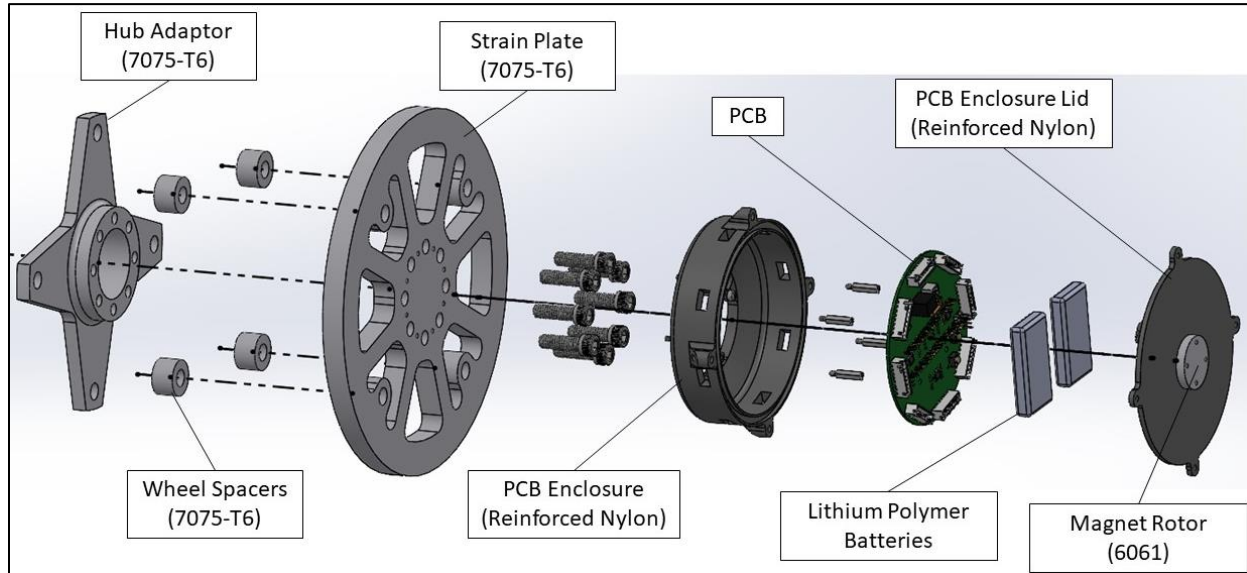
Exploded CAD model of the completed WFT design including the DAQ subsystem.
